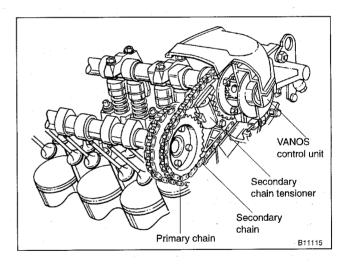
Cutaway view of camshaft timing chains on 1993 and later 6cylinder engine with VANOS.
